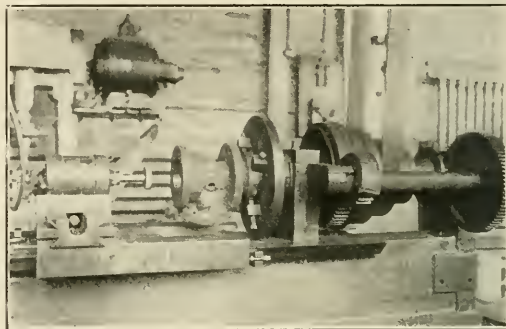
Engine Lathe Fitted for the Internal Grinding of Triple Valve Bushings
